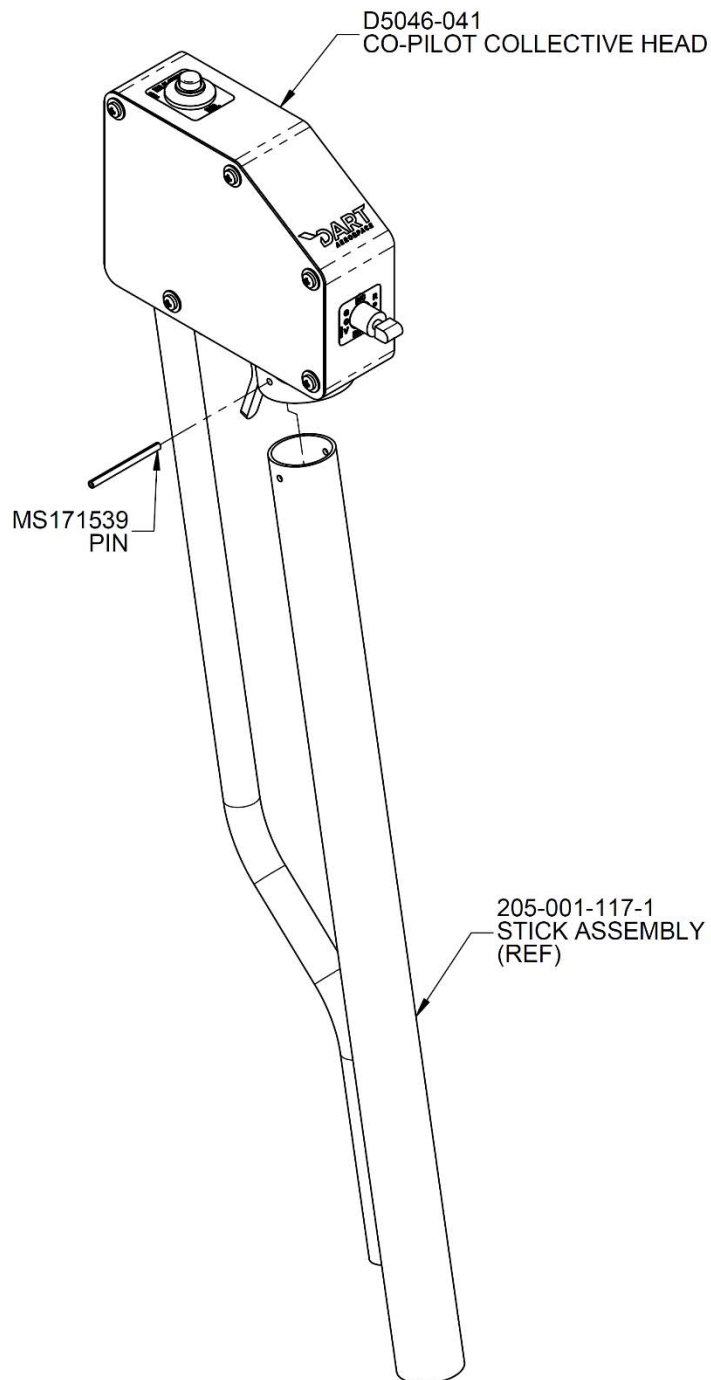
D205-803-111/-113 Co-Pilot Collective Head Installation
